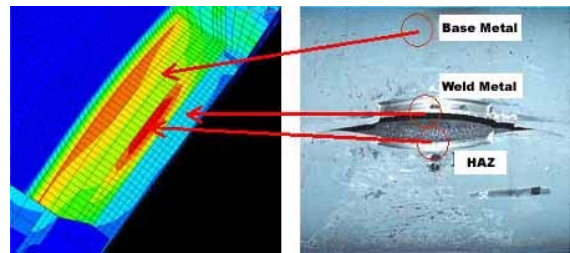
The stress profile of finite element analysis and the failure shape of burst test specimen for seam weld.
